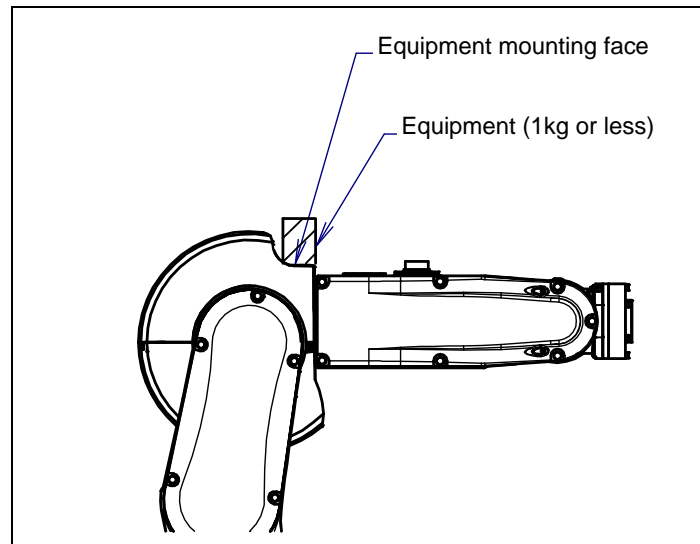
(a) Load condition of equipment mounting face (CR-4*i*A)
